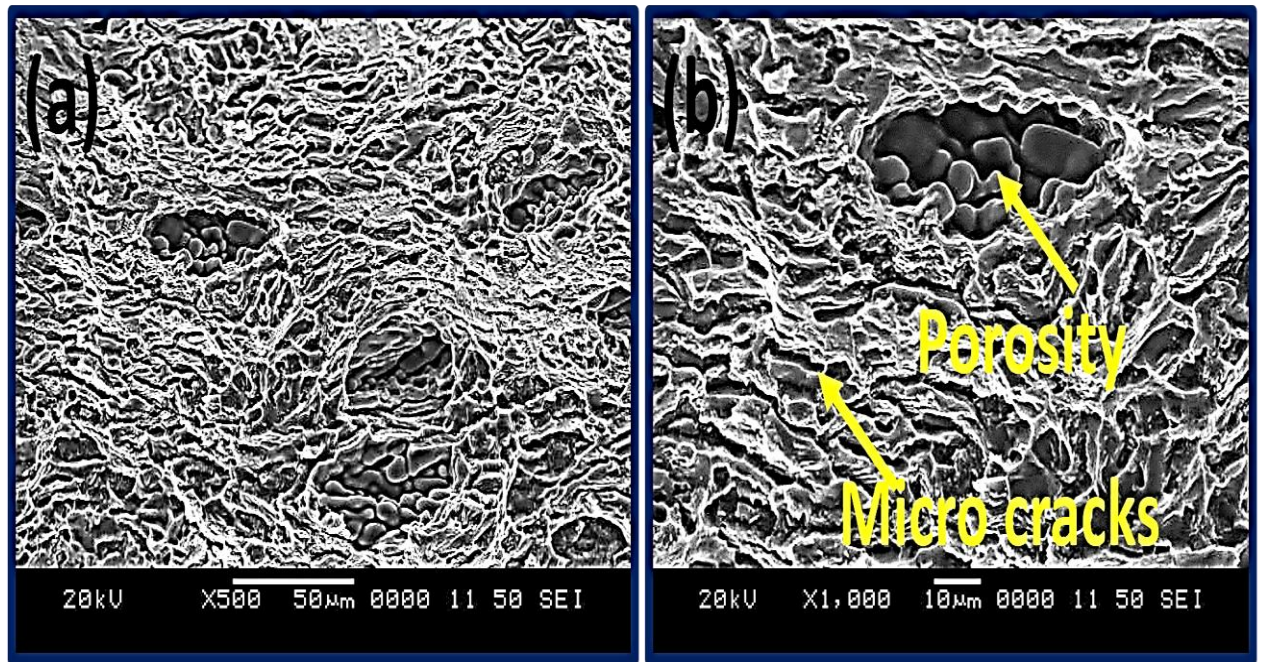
SEM images of fracture surfaces of the over-all weld region in CMT welded A6061-T6 and A6082-T6 joint using ER4043 filler wire (a) low magnification image and (b) high magnification image
